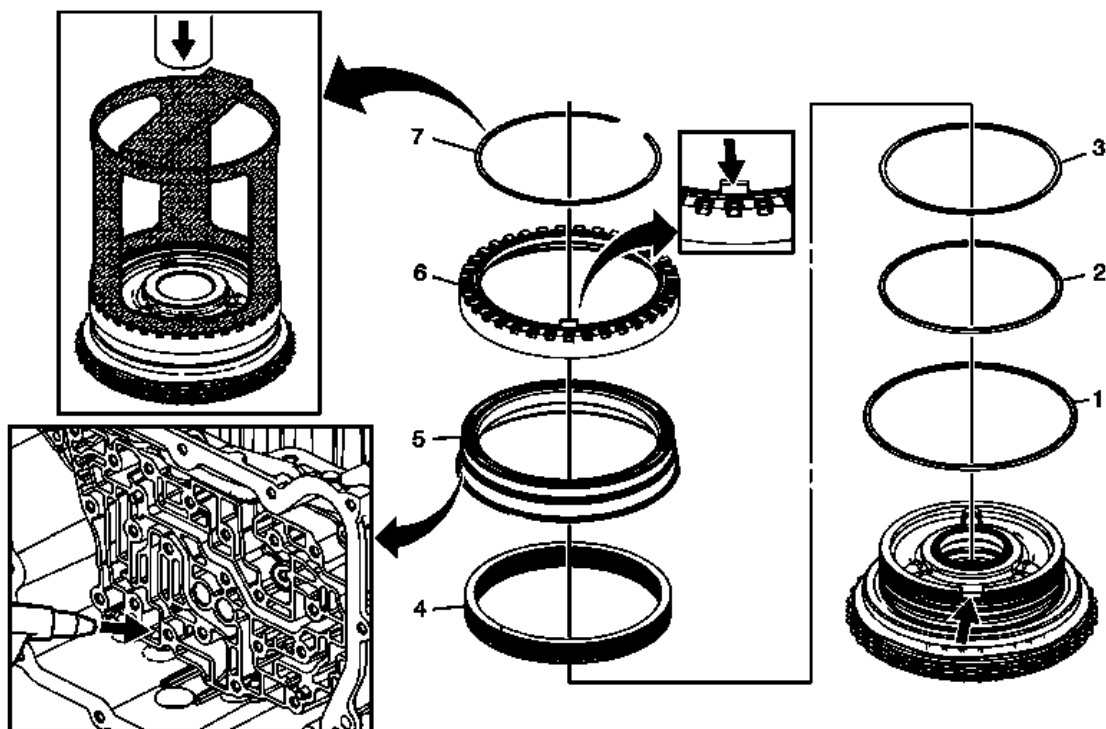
Exploded View Of Reluctor Wheel & Piston
